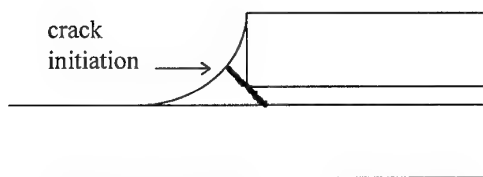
Locus of fatigue crack initiation in adhesive bonded joints
